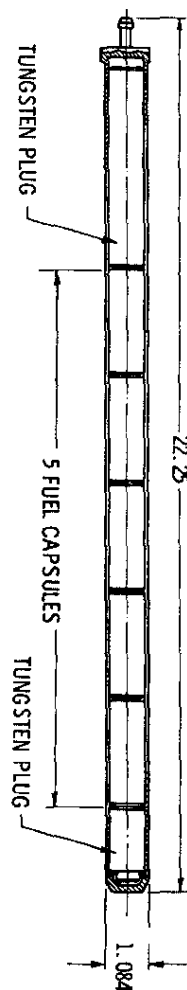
^{60}Co FUEL PIN ASSEMBLY FOR WANL UNIT
